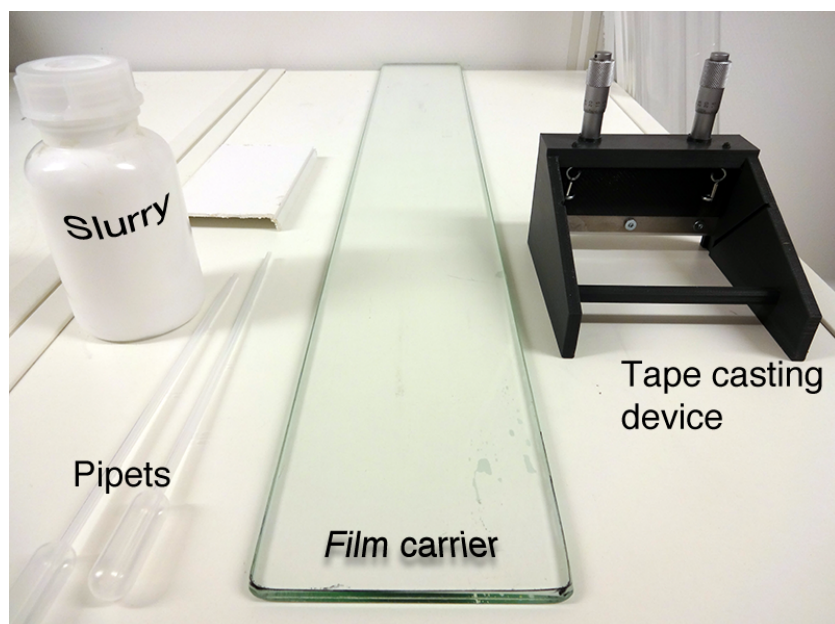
Equipment needed. Vacuumized slurry, some pipets, the tape casting device and tailored glass plate (film carrier).
